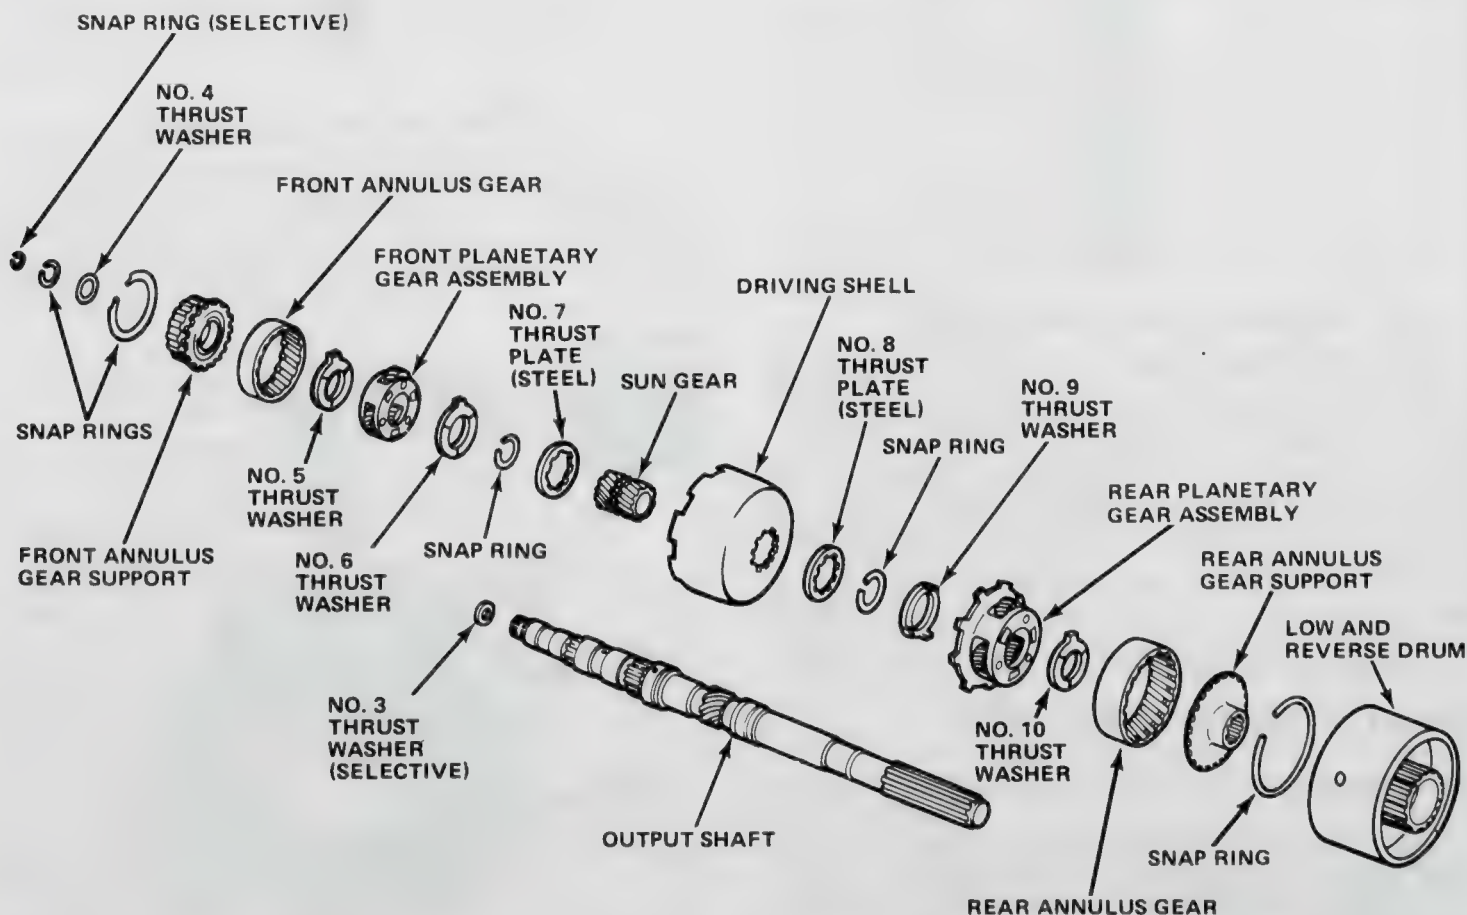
C-89 Planetary Gear Assembly—Models 904-998
